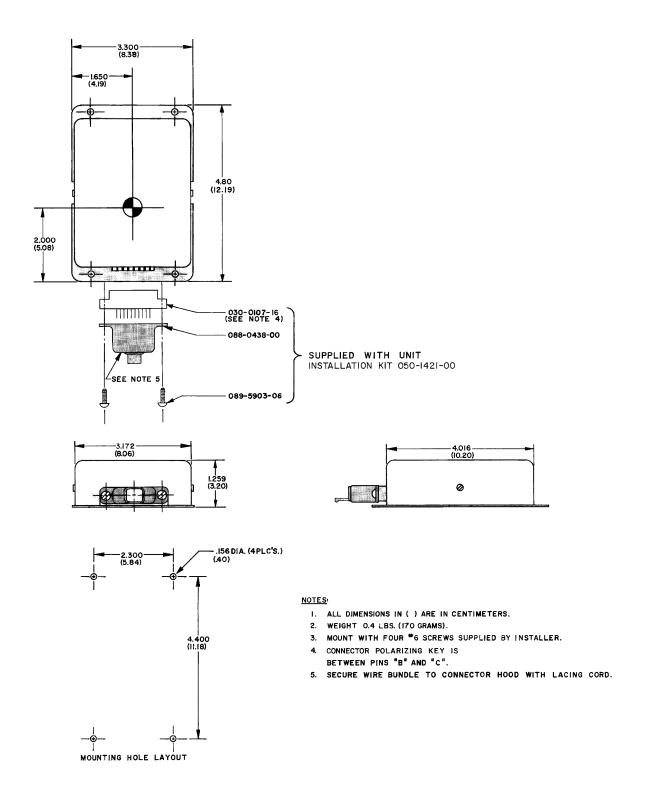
KA 51B INSTALLATION DRAWING (Dwg. No. 155-05371-0000, R-4)
